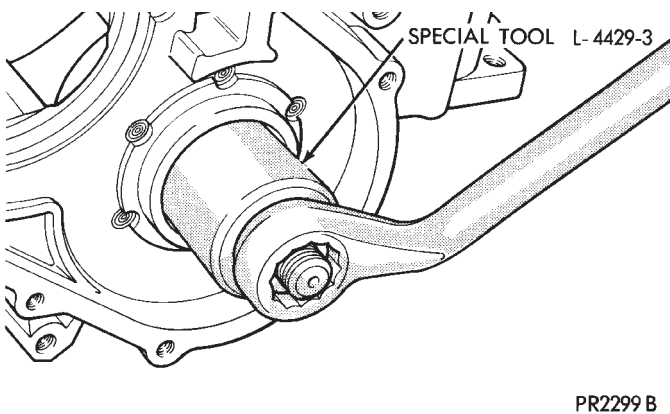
Install Rear Planetary Annulus Gear Bearing Cone
